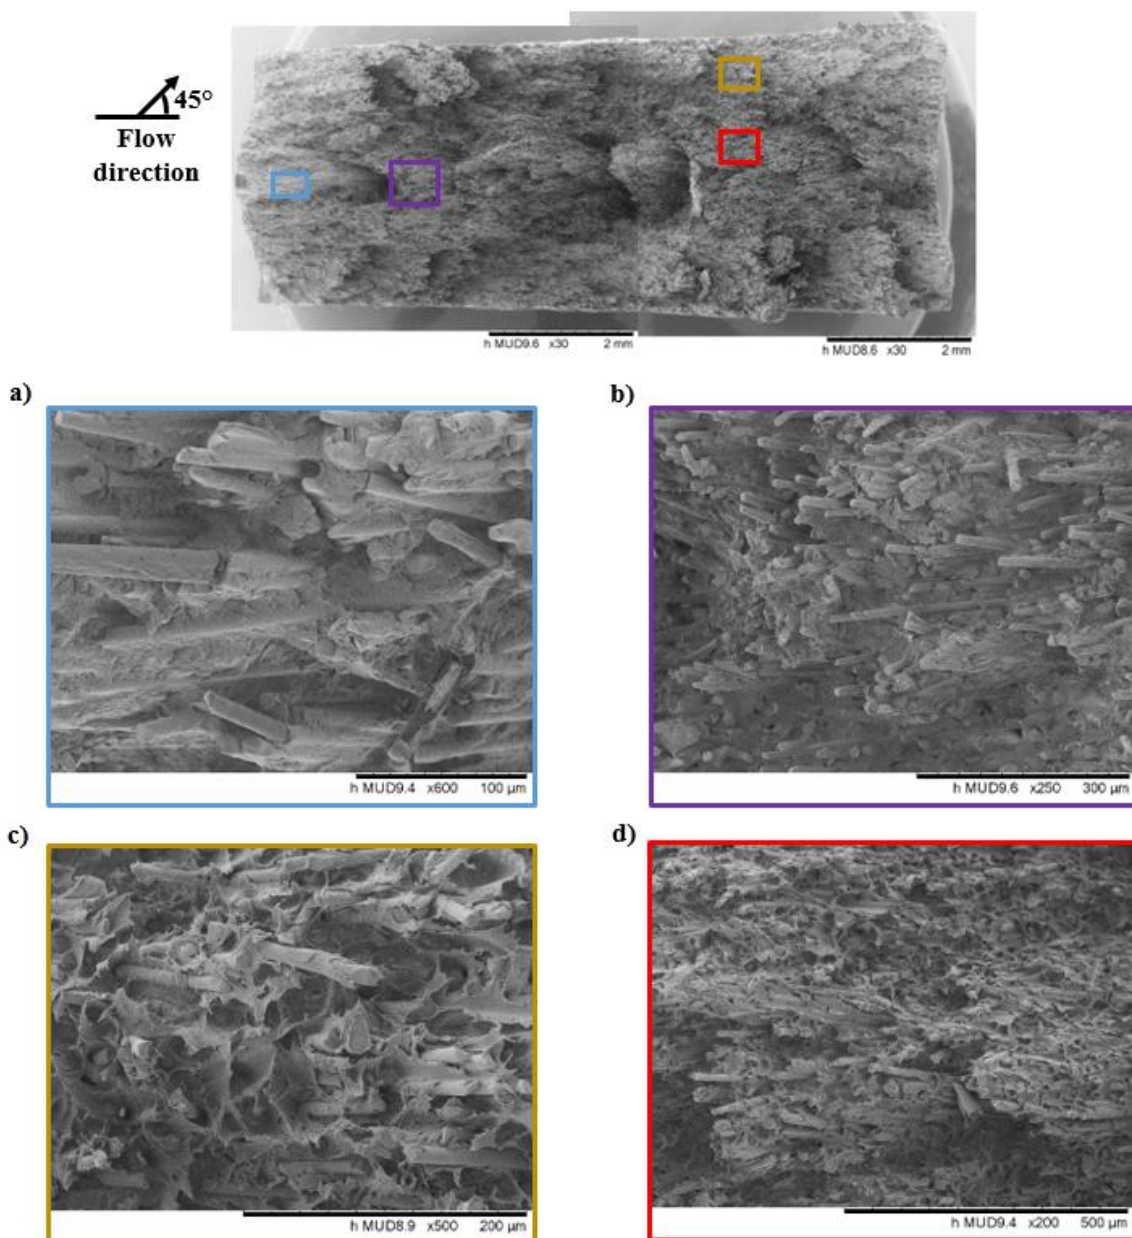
Fracture surface of a tensile 45° specimen at room temperature
